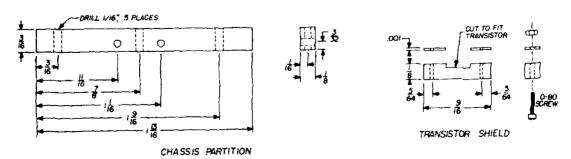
Full-size layout drawings of chassis partition and transistor shield. Material is brass.
